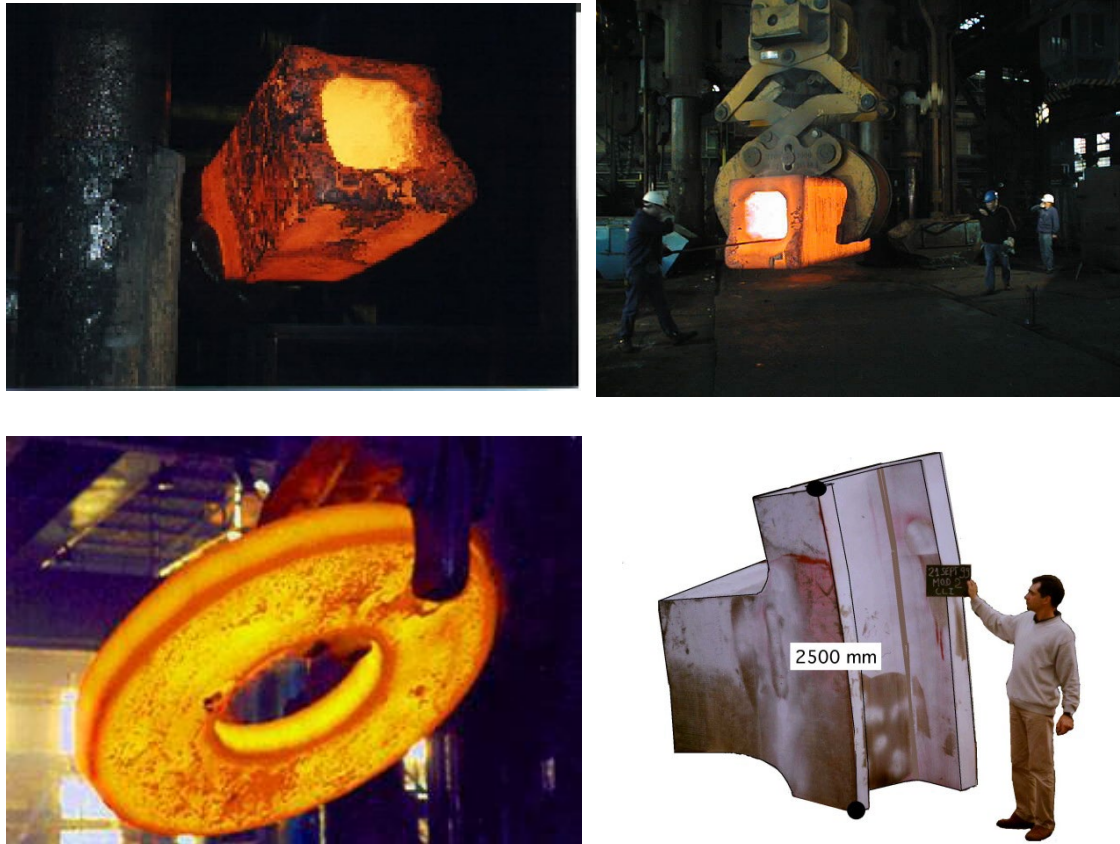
Forging and Casting trials on Austenitic Steels, 2000-2005.
